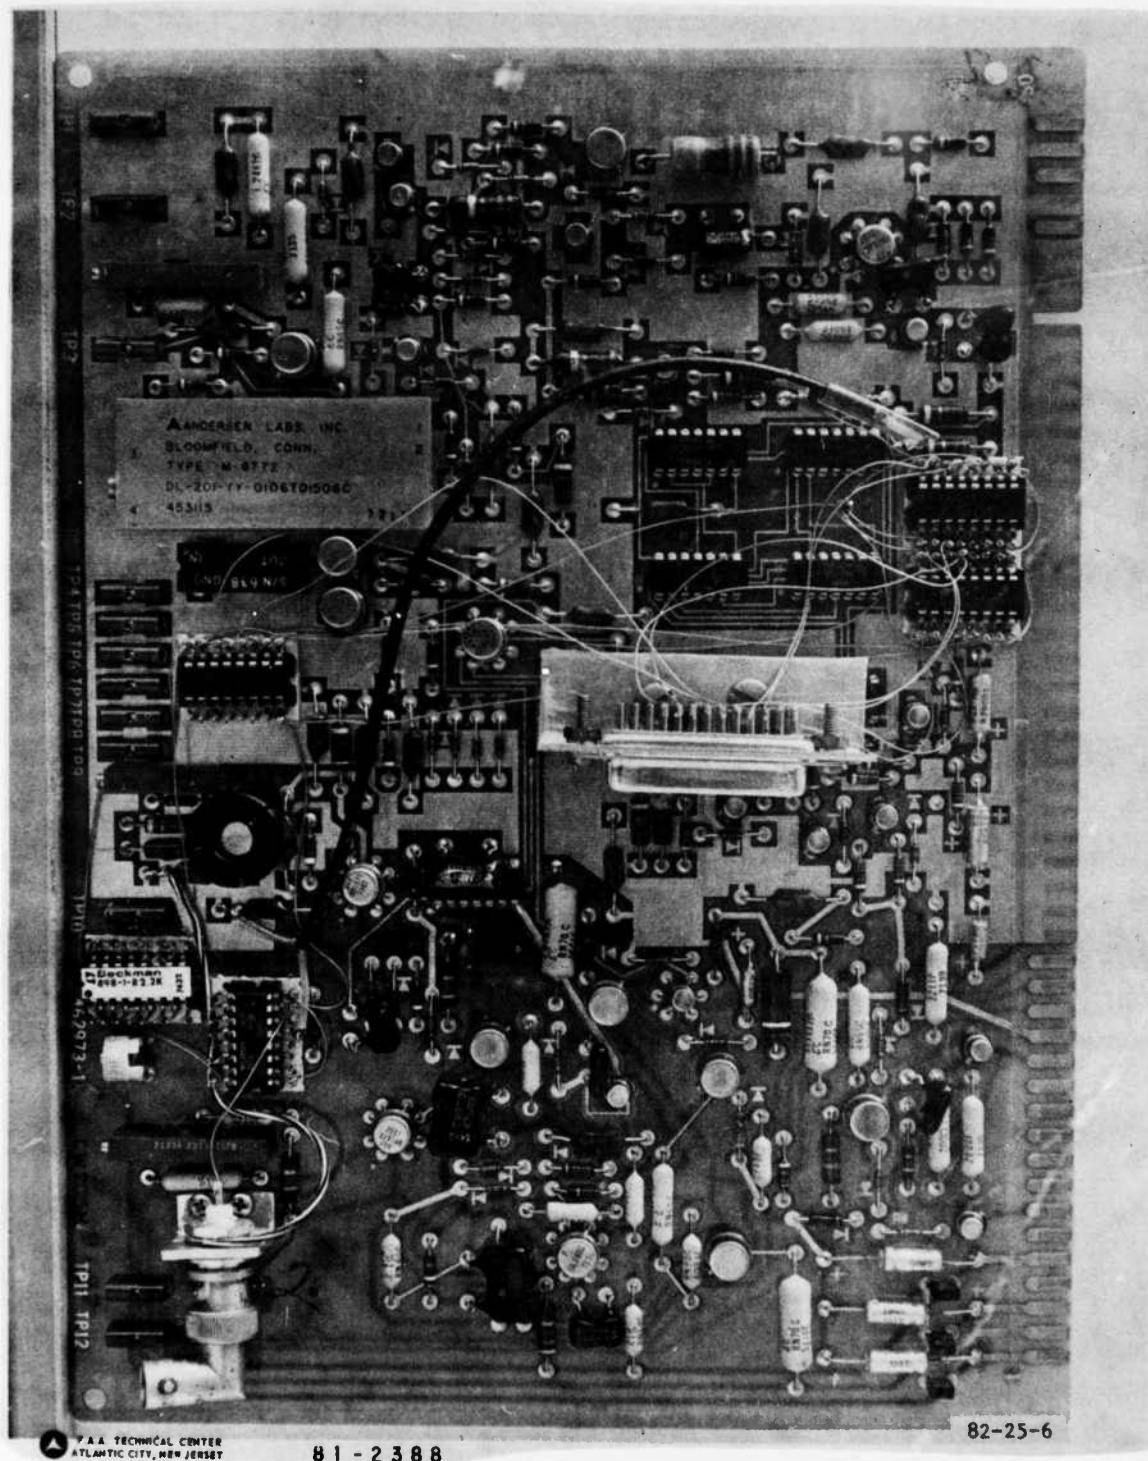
MODIFIED A2 PCB — DRIVER PVD
